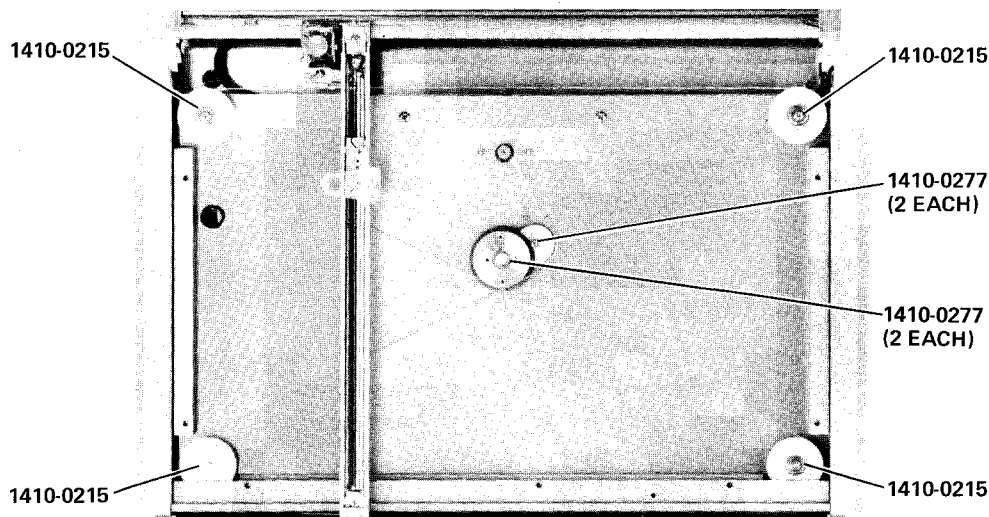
X-AXIS DRIVE TRAIN BEARING LOCATIONS
